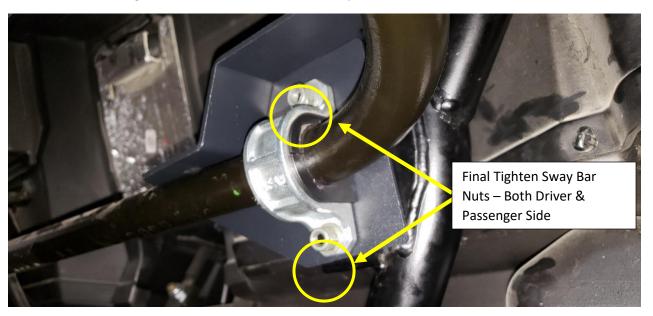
Driver Side Sway Bar Final Torque of Nuts/Bolts
